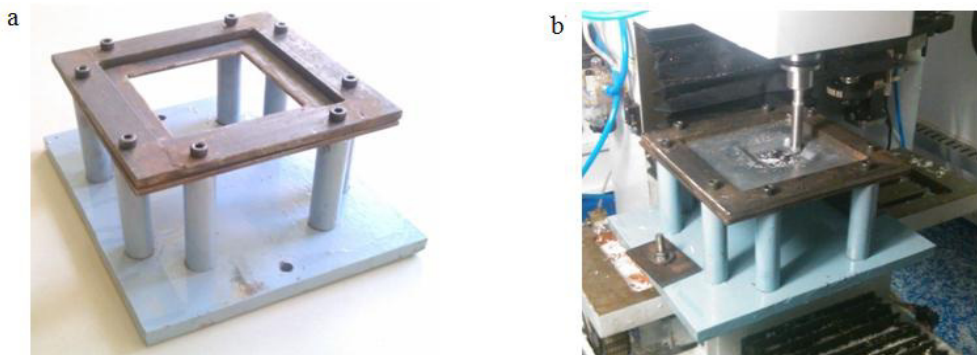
(a) Fixture to hold sheet metal and (b) fixture with sheet metal mounted on CNC machine
